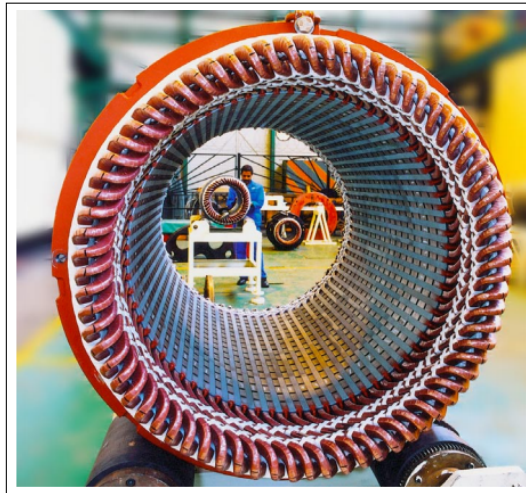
ACTOM South Africa 7 MW mill motor wound stator core [4].
